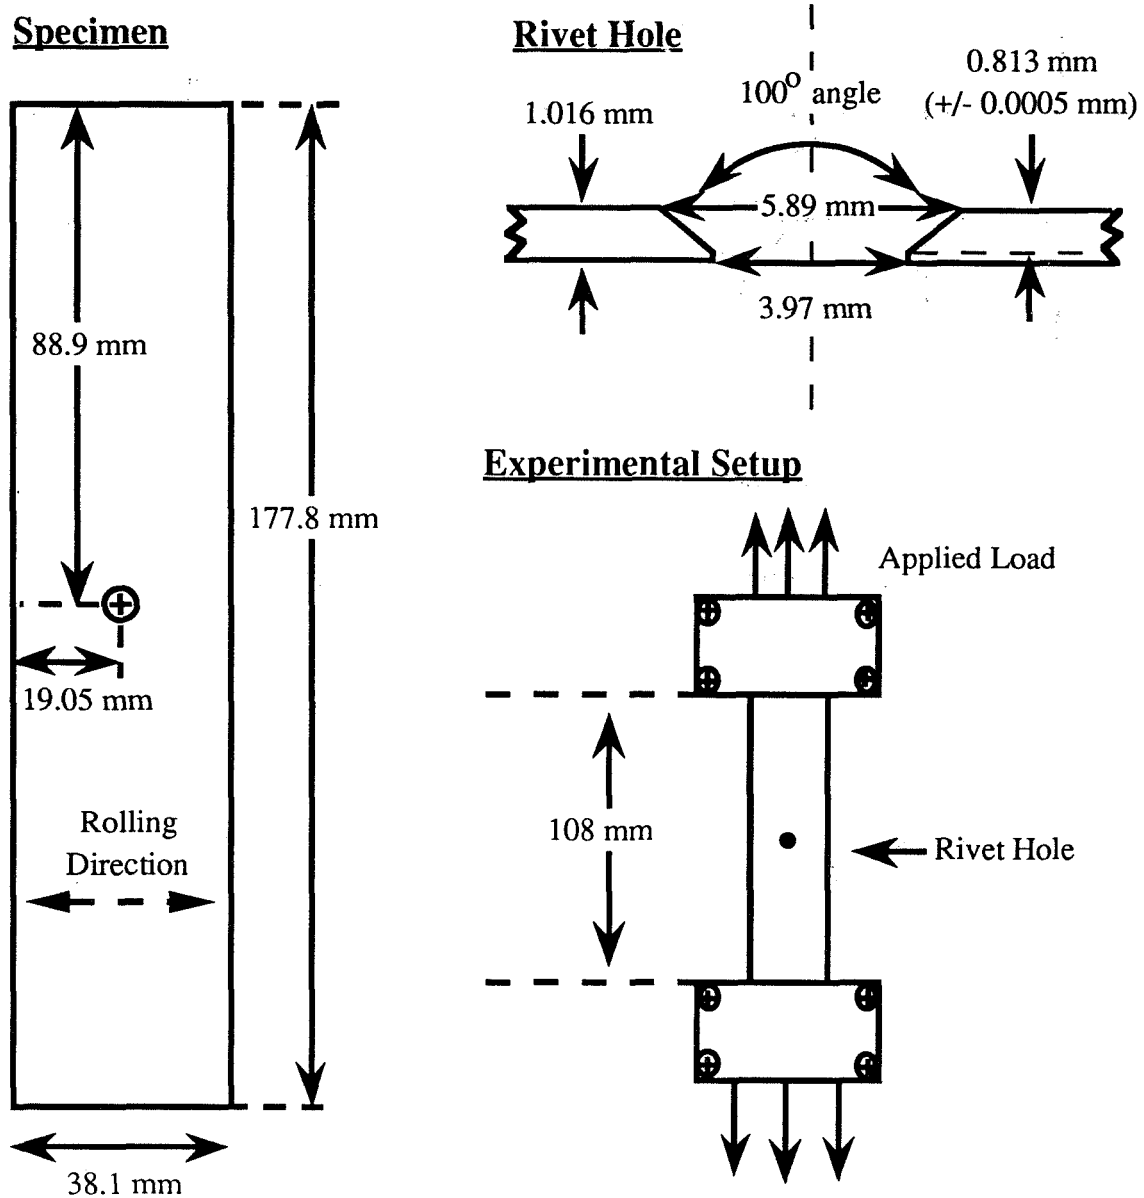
Specimen dimensions, rivet hole dimensions and experimental setup including loading and rolling directions.
